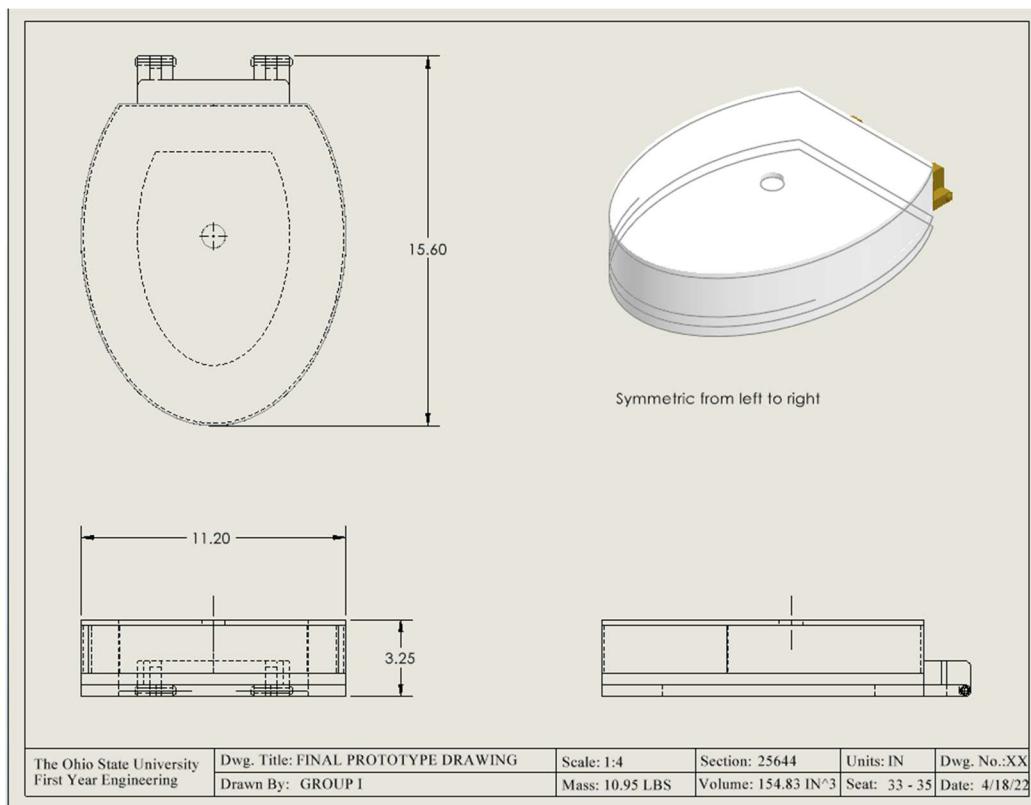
Page one of Final Prototype Drawing Packet. It has three orthographic views of the full design and one isometric.
